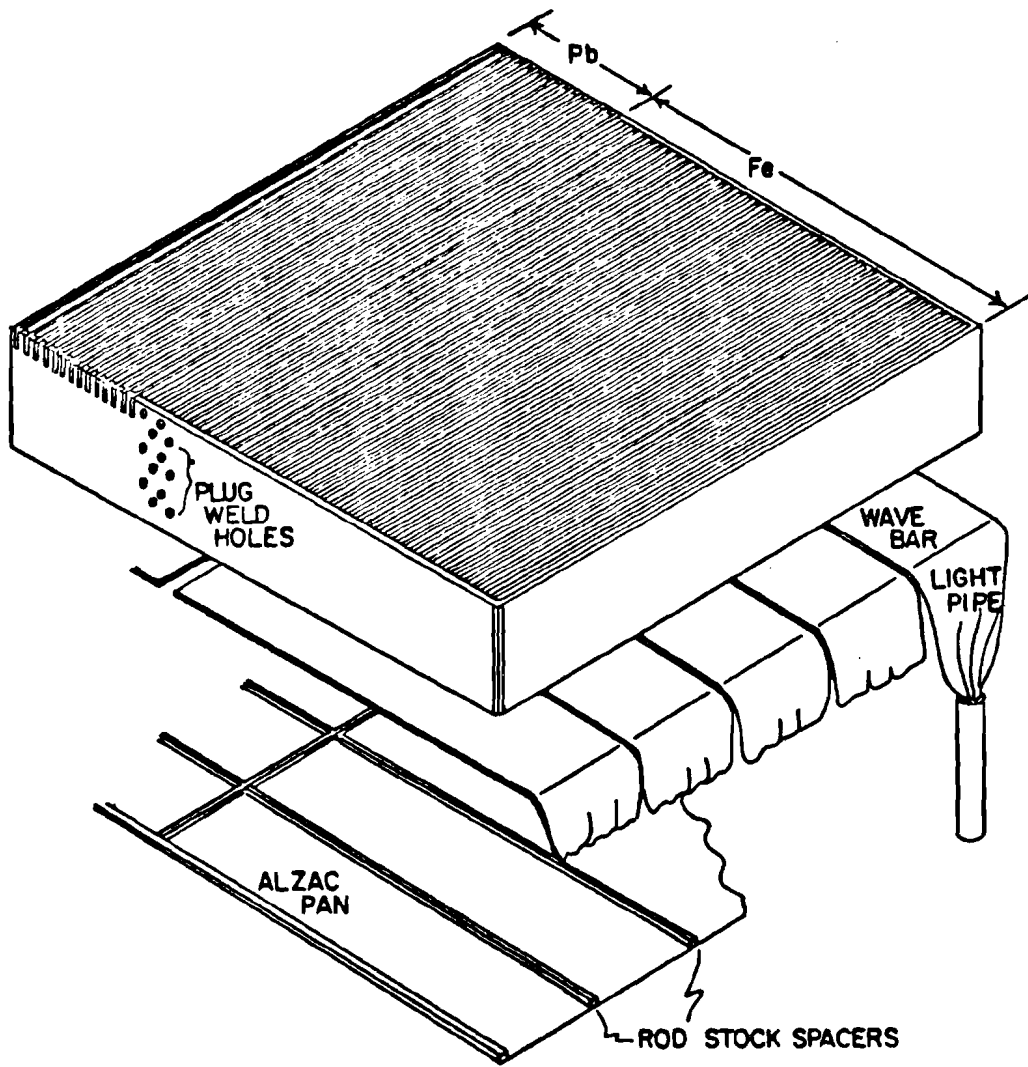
Exploded view of a portion of the calorimeter, showing parts of five EM and five FH modules.
